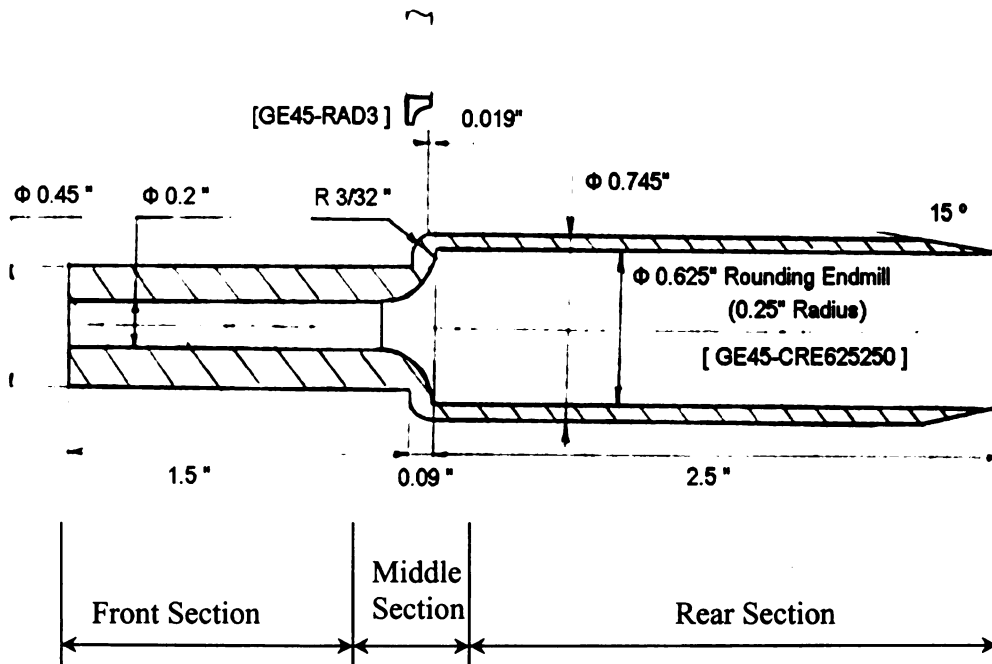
(a) Overall geometry and dimensions of the projectile body.
